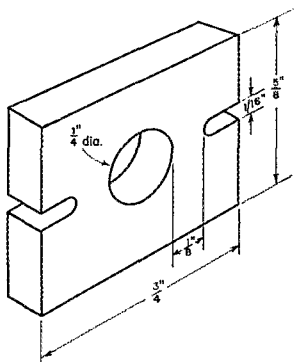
Dimensions of the insulating spacers used to hold bridge wires and outer conductor strips in place.
